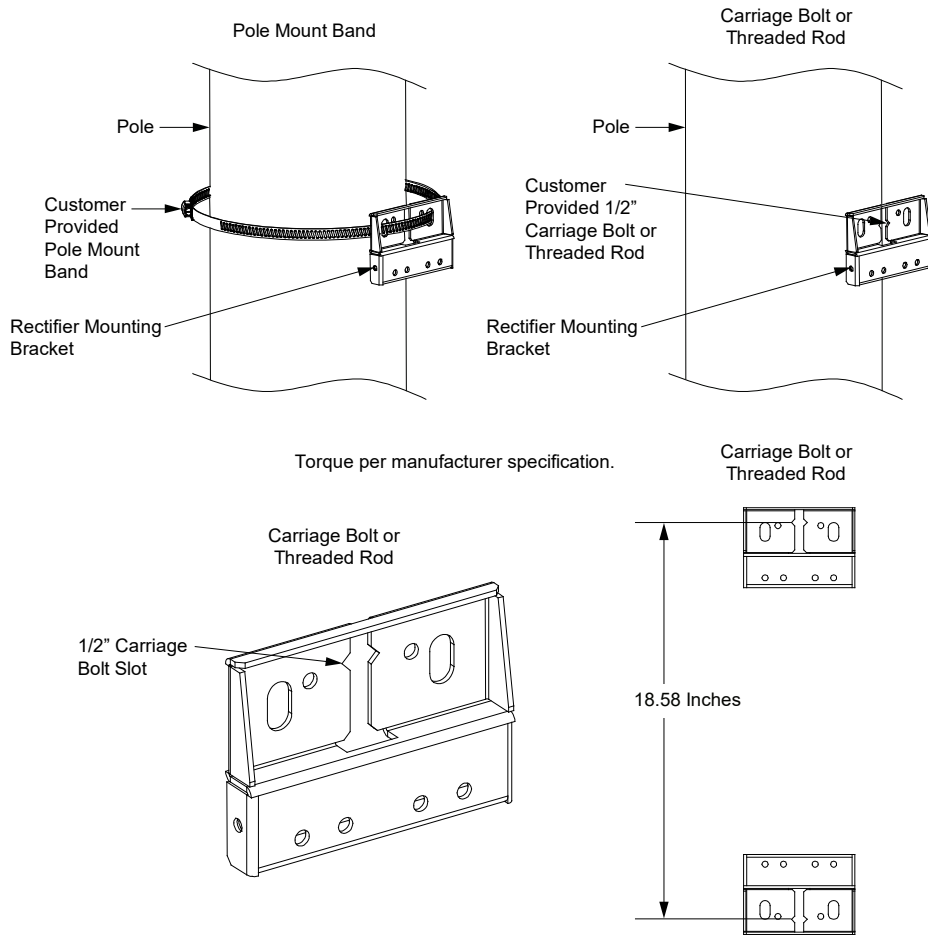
Installing the Top and Bottom Mounting Brackets and Strain Relief Plate to the Rectifier (cont'd on next page)
